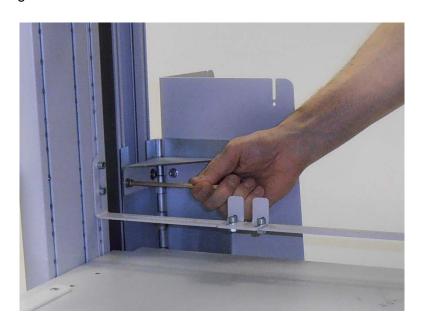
(1) 5 mm Hex Key; (2) Socket Head Cap Screw; and (3) Flat Washer.
